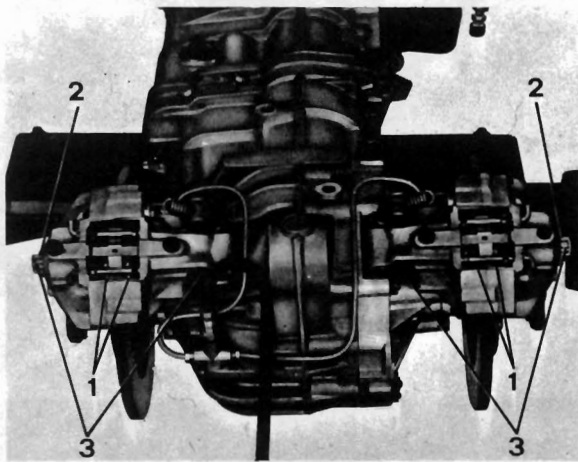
Brake disc pad clearance adjusting items (Sec 11)
